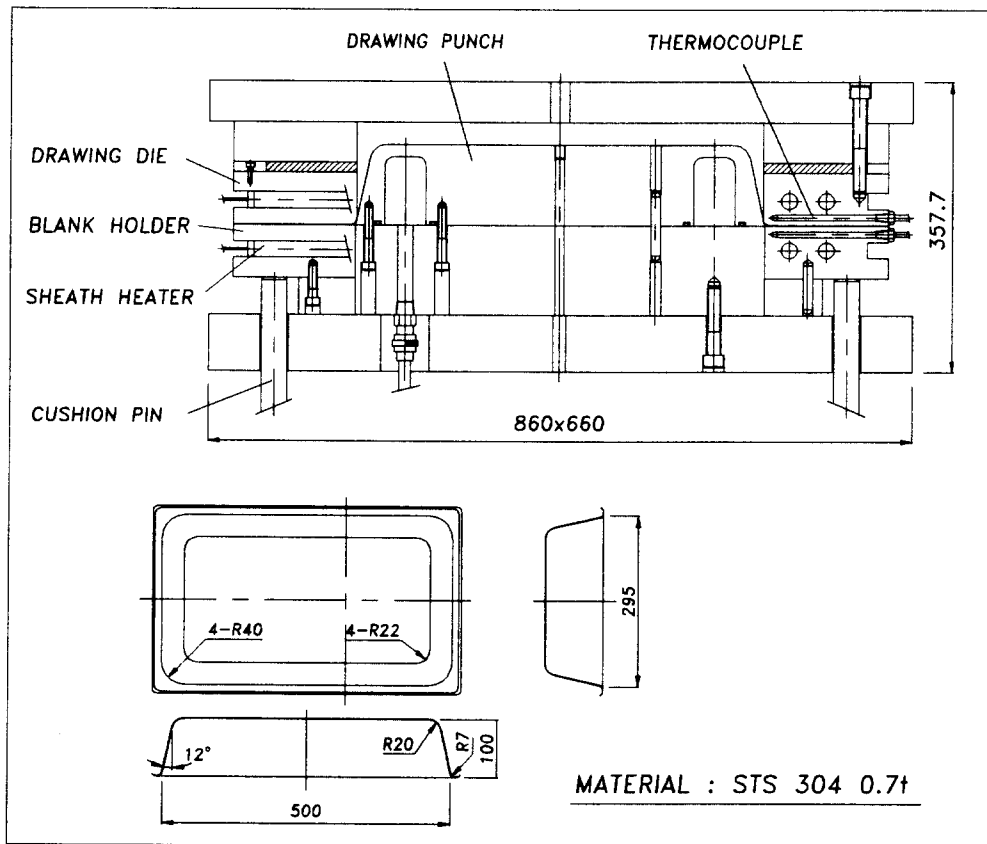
Sectional view of warm deep drawing die and drawing of butt product
